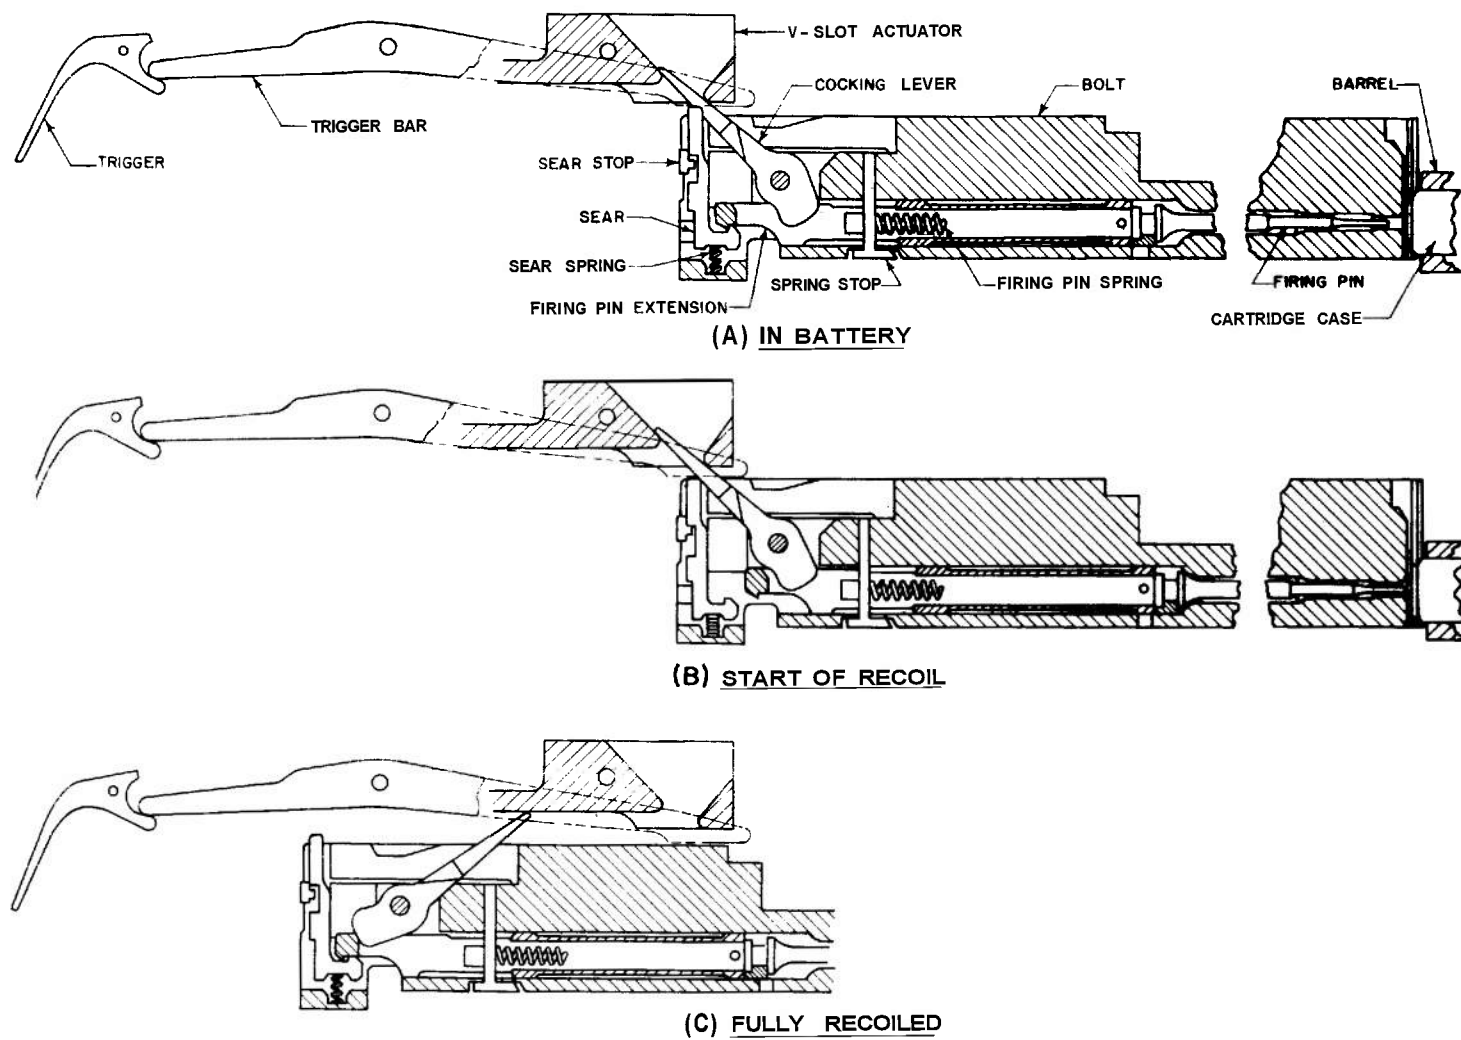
Firing Mechanism for Recoil Machine Gun
